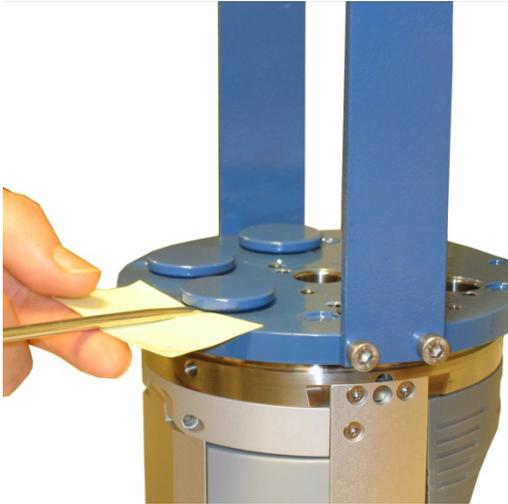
Removal of sealing plug. Loosen the set screw. Use a small bit of paper/ cardboard to protect the top end plate.
